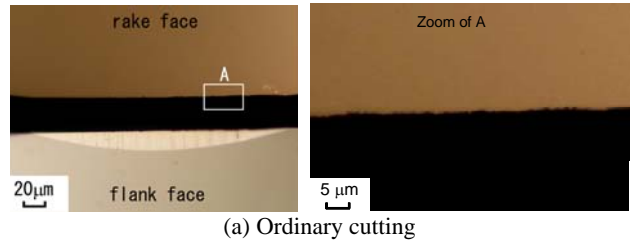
Microphotographs of tool edge after cut at the cutting speed of 569 mm/min
